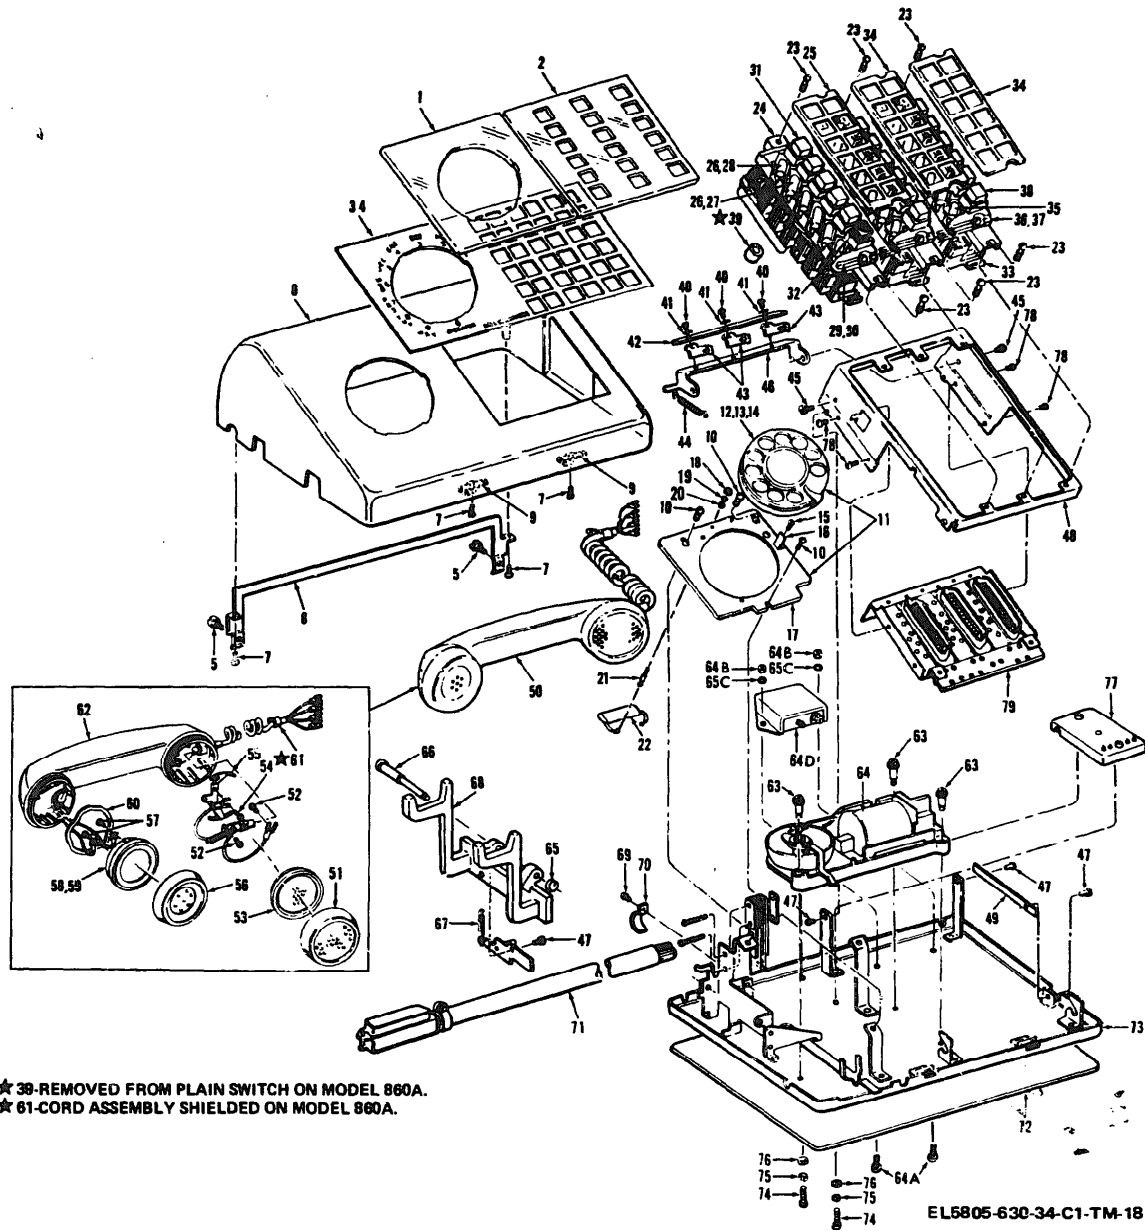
Call Commander Telephone type 860 and 860A, exploded view.
